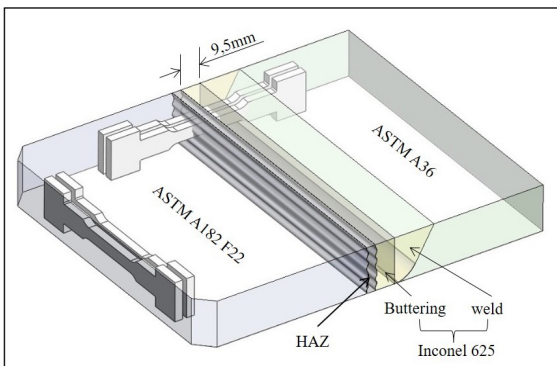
Dissimilar ASTM A182 F22 steel – Inconel 625 – ASTM A36 steel, welded joint showing the extraction direction of the tensile test specimens.
